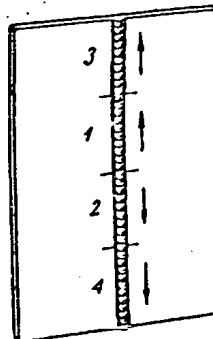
Welding of long sheets from the middle towards the ends
